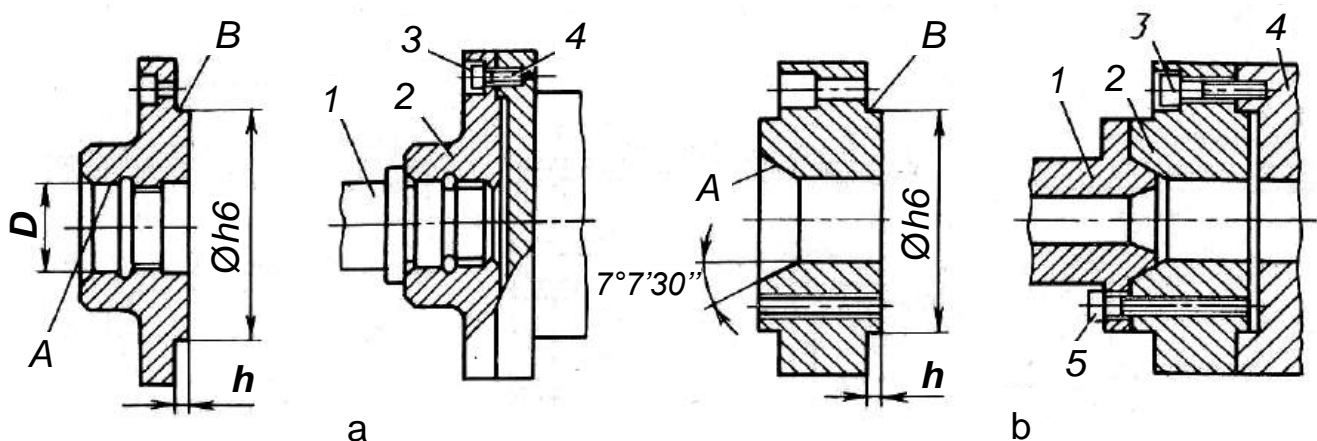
Installation of workholding devices on intermediate flange in turning machines
